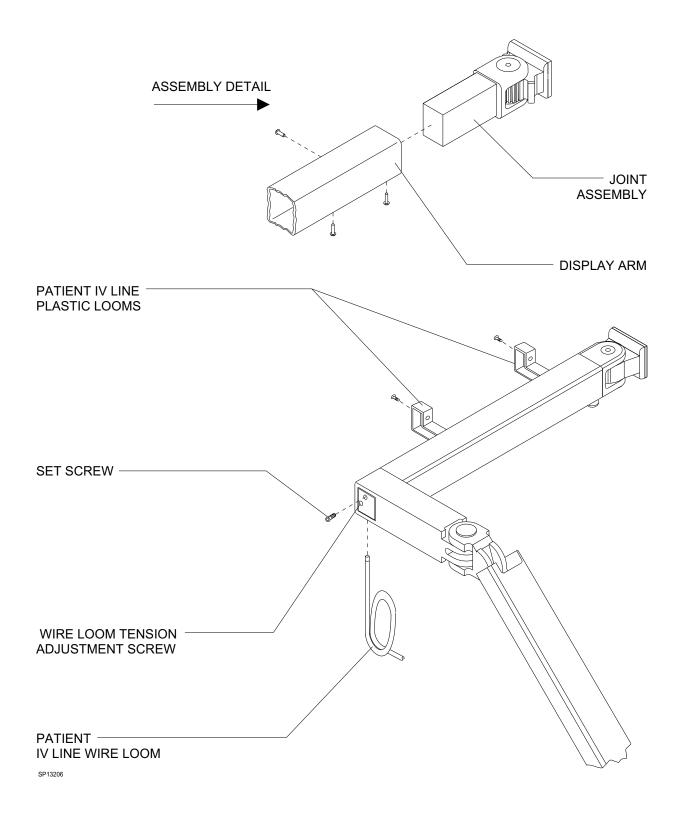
ASSEMBLING THE DISPLAY ARM HARDWARE
